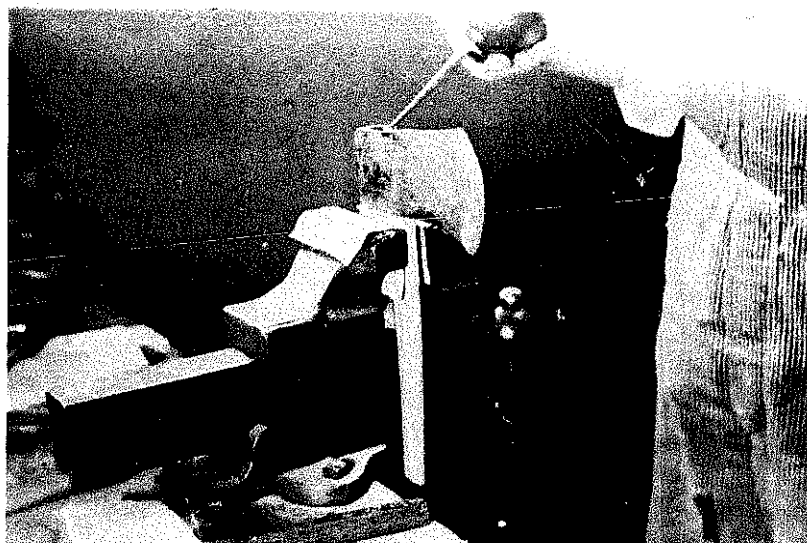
The wedge and handle are being soaked with boiled linseed oil. Note the sheet metal pieces on the vise jaws to prevent damage to the wooden handle.
